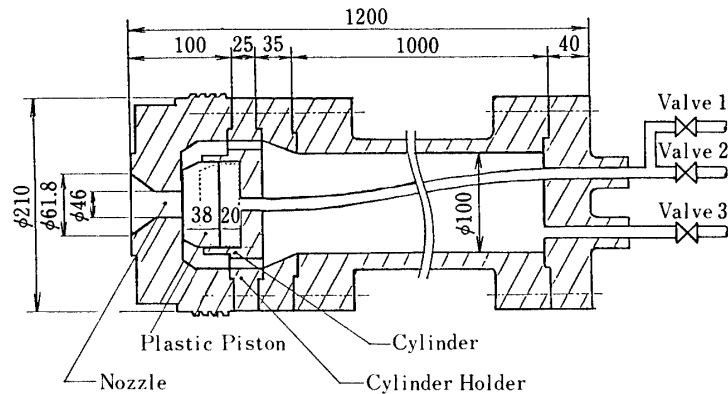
Cross-sectional view of high-pressure chamber and automatic valve.
